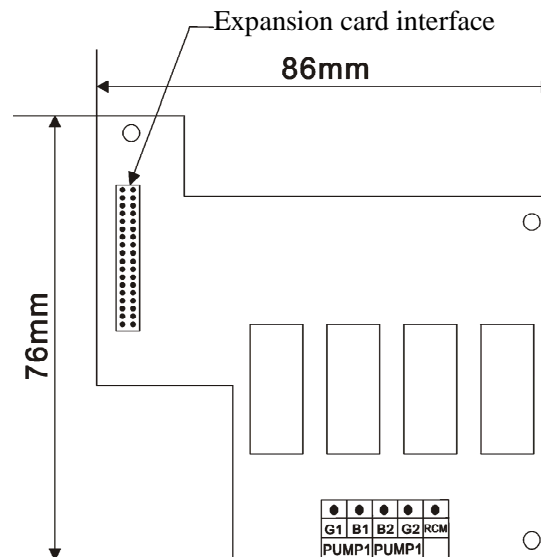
“one drive two” consistant pressure water supply card outline dimation drawing
